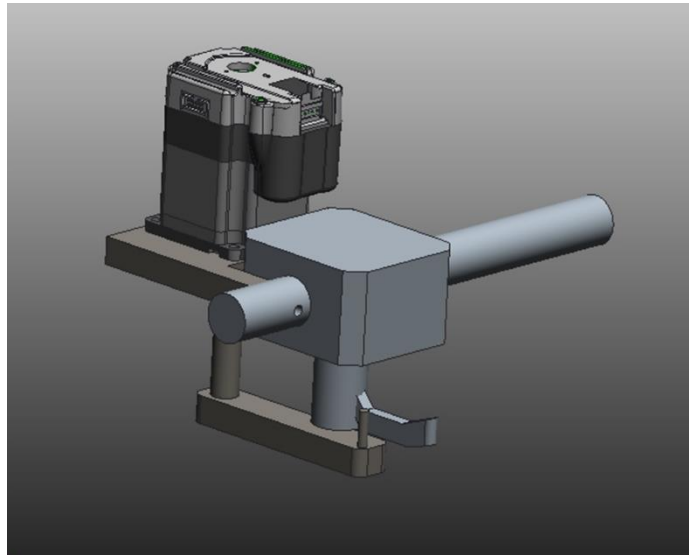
Mounting for stepper motor. Manufactured parts are shown in dark brown coloring
